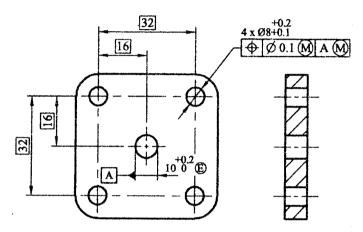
(a) - Positional tolerance of four holes related to a datum hole
